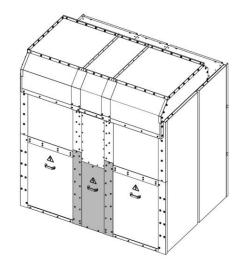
Contactor panels with panel width 435 mm only: Rear wall, 3-panel arrangement
